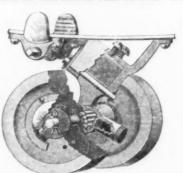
Sectional View, Showing Anti-Friction Bearing.
